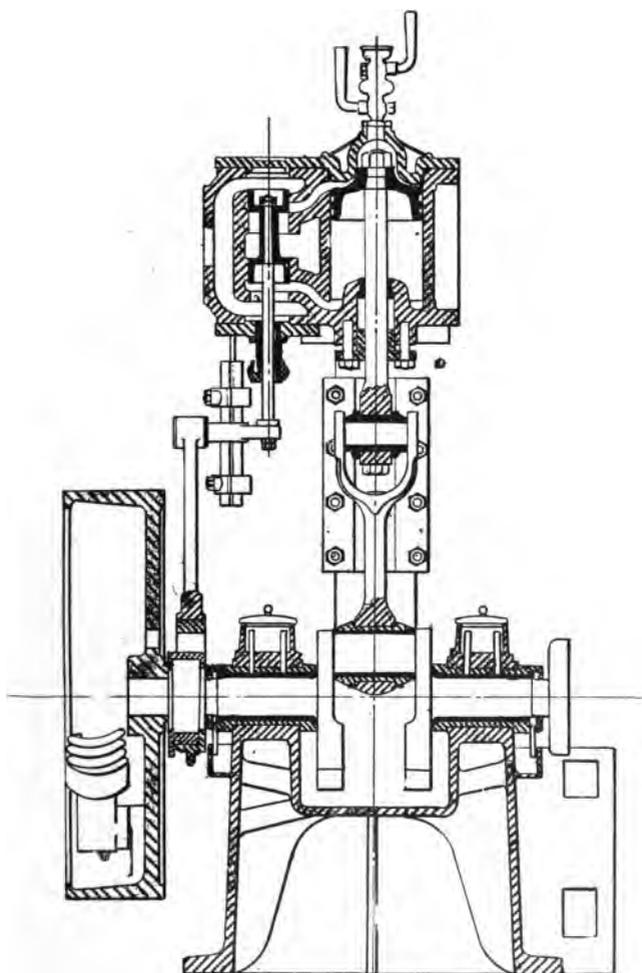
SECTIONAL VIEW OF THUNE'S DOUBLE ACTING SINGLE CYLINDER ENGINE.
